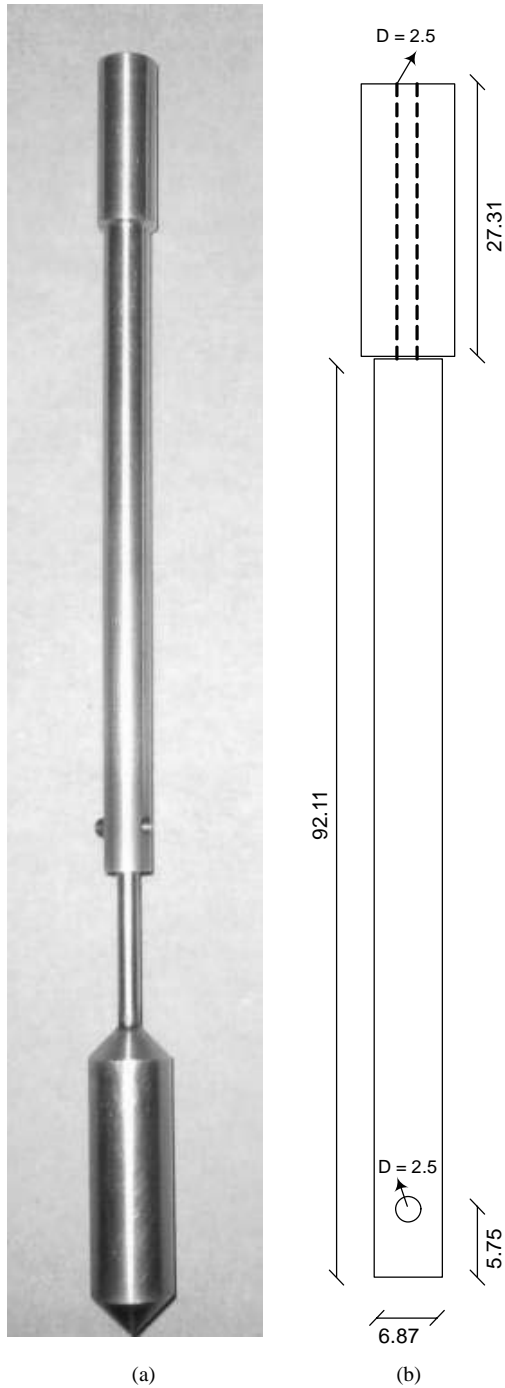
(a) Rigid rod with Spindle Assembled, (b) Schematic of Rigid Rod
